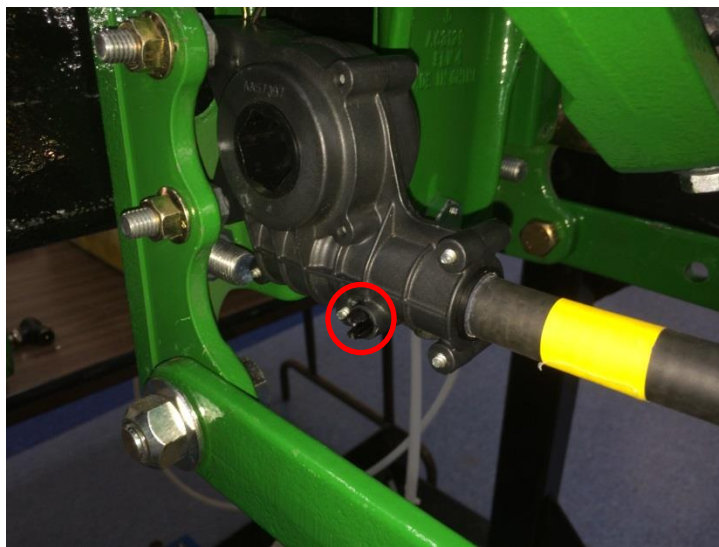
, Remove the Black Pin in the Hex Bar Gear Box
